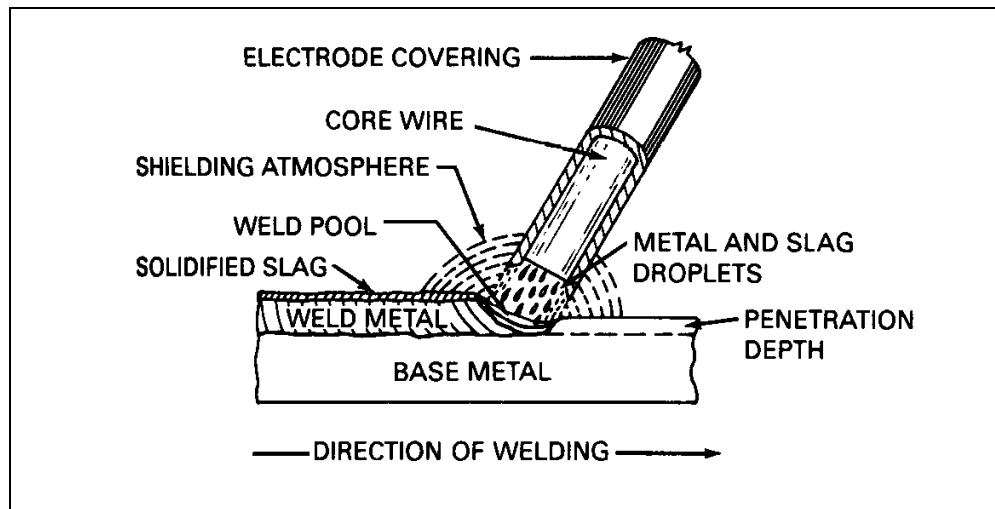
Shielded Metal Arc Welding (SMAW) Process (Courtesy American Welding Society)
